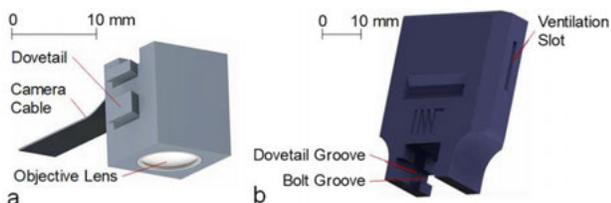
The Compact Microscope Module (a) can be attached to the handle mount (b), which is housing the camera electronics.
